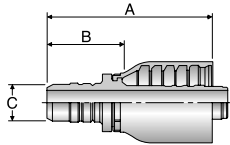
This is a Tube Fittings Division part. Information can be found in Catalog 4300.
